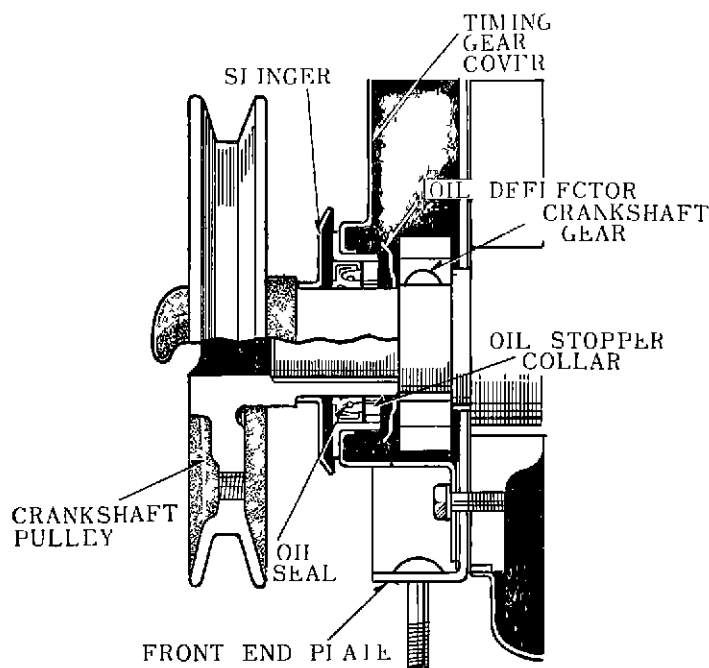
Crankshaft Pulley and Timing Gear Cover Assembly
